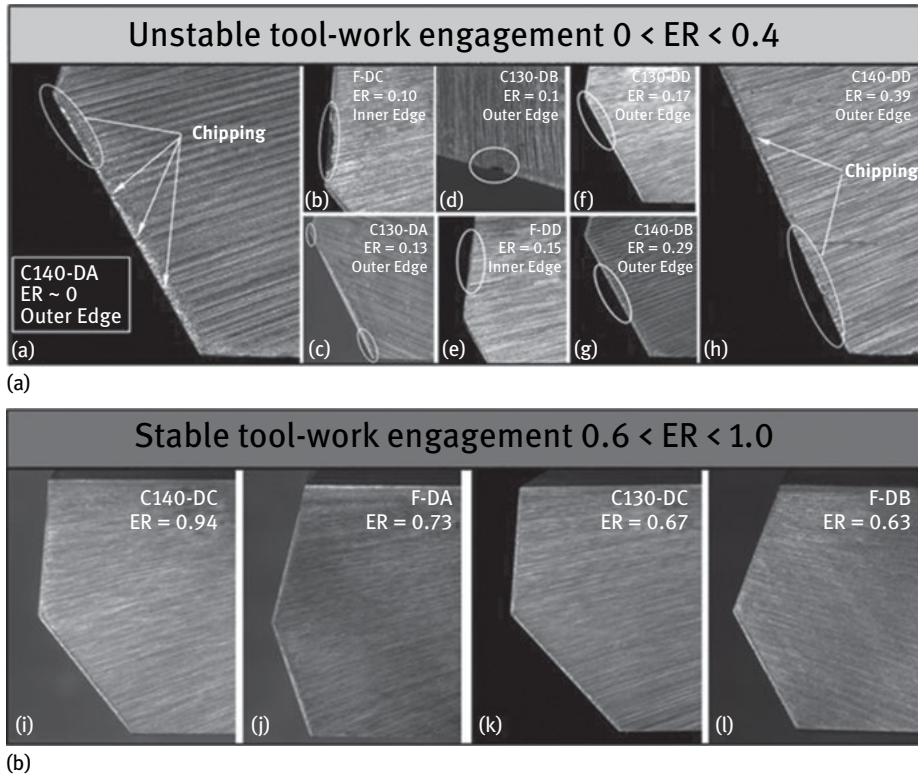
Effect of engagement ratio on tool edge chipping (a) Unstable Engagement and severe chipping on cutting edge for $0 < ER < 0.4$ and (b) smooth engagement and uniform wear along cutting edge engagement for $0.6 < ER < 1$ [33].
